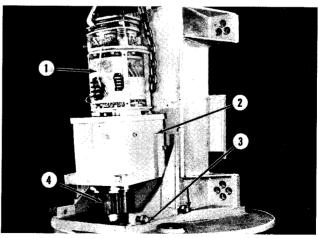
REMOVING MOTOR AND GEAR BOX 1. Motor 2. Gear Box 3. Setscrew 4. Pinion
